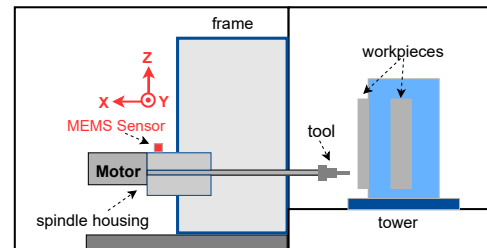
Schema of the 4-axis machining center with mounted sensor [42].
